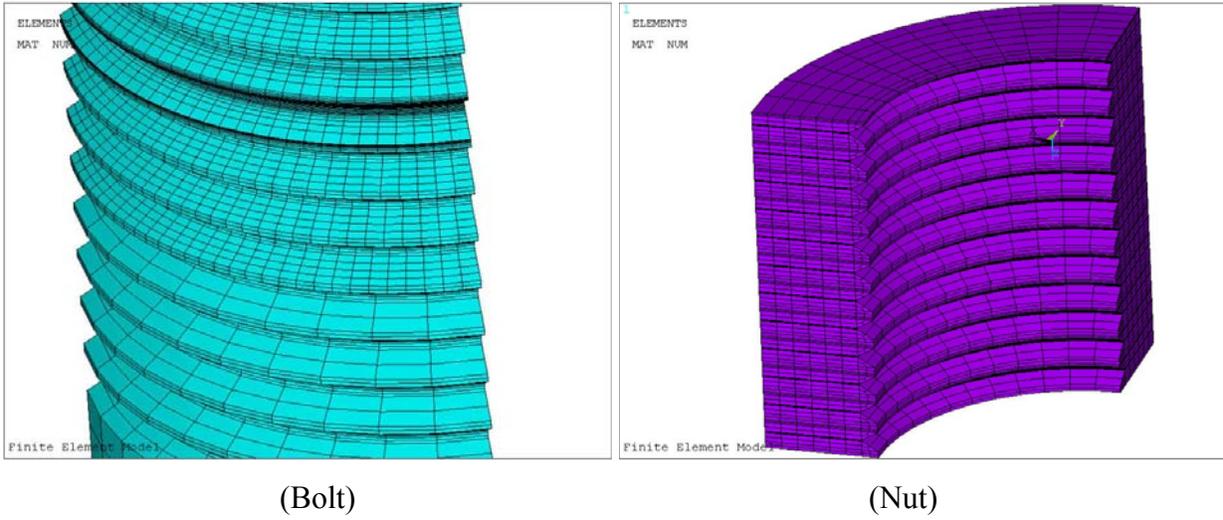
3-D Finite Element Model, Bolt and Nut Thread Detail View
